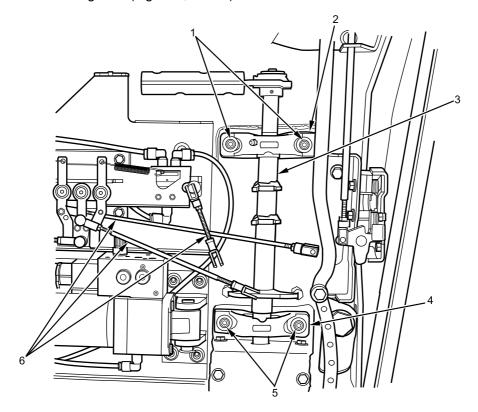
Retaining Clip Removed from Lower Linkage Rod and Door Latch Plate.
